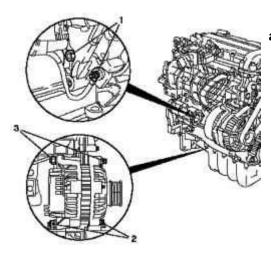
Removal of the alternator: 1 - nuts, 2, 3 - Bolting
